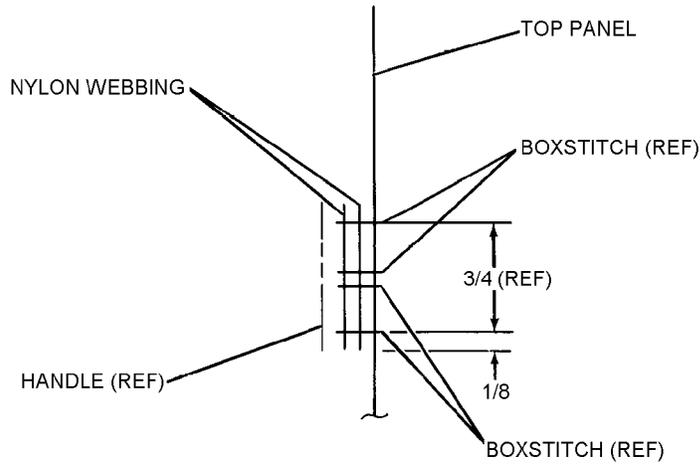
Top Panel Assembly, LRU-13/A Liferaft Container (Sheet 1 of 2)
